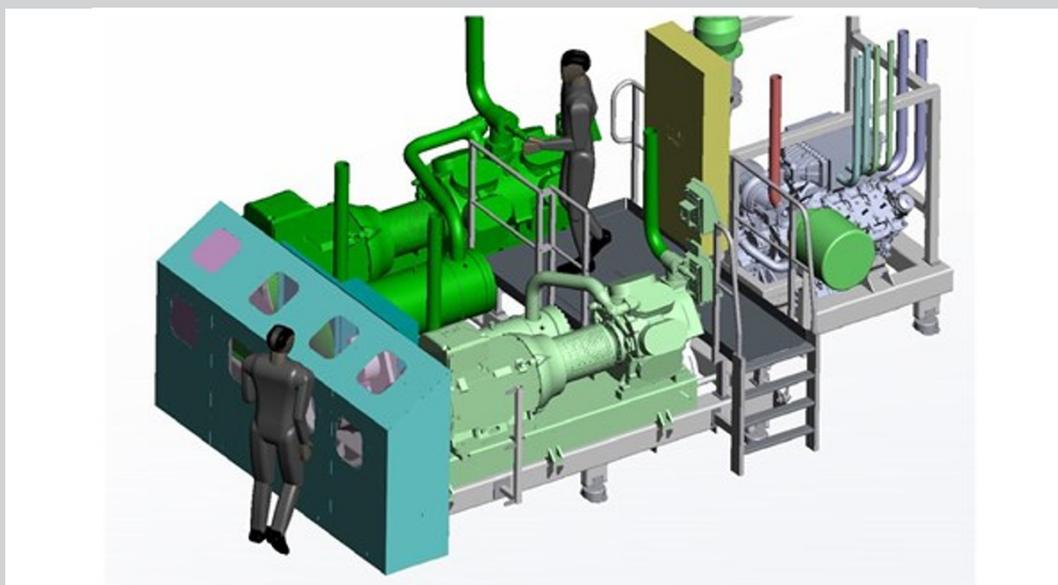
3D-model of the gas engine driven heat pump unit in Tønder [www.tonder-fjernvarme.dk].
